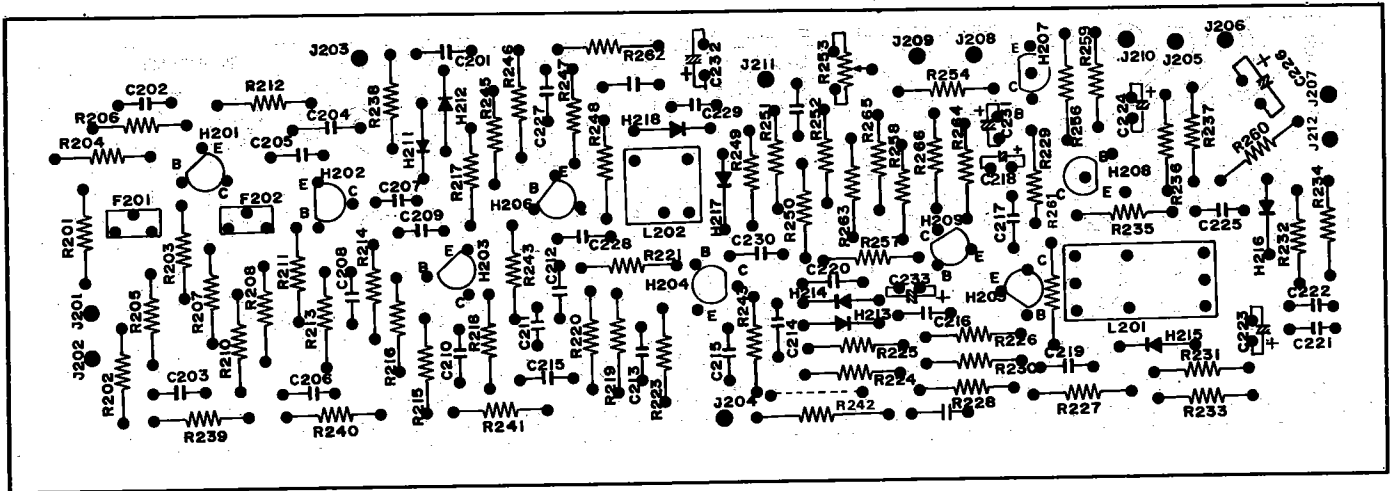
FM Front End and AM Tuner Assembly P100 Component Locations
